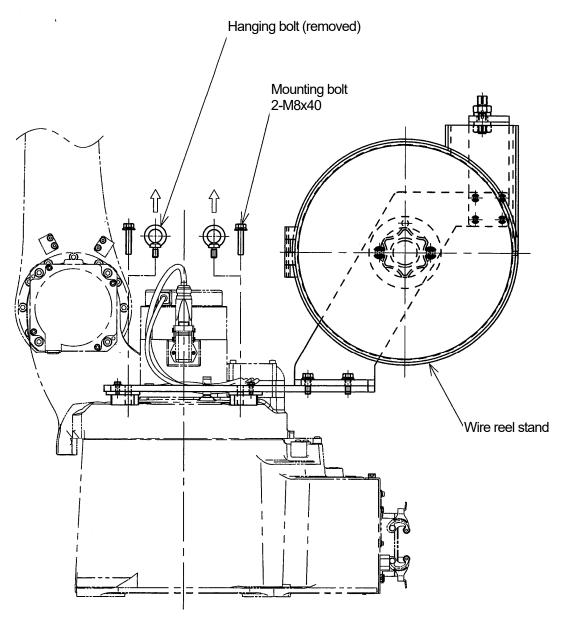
Mounting of wire reel stand for JT1 (BA006N/L)
